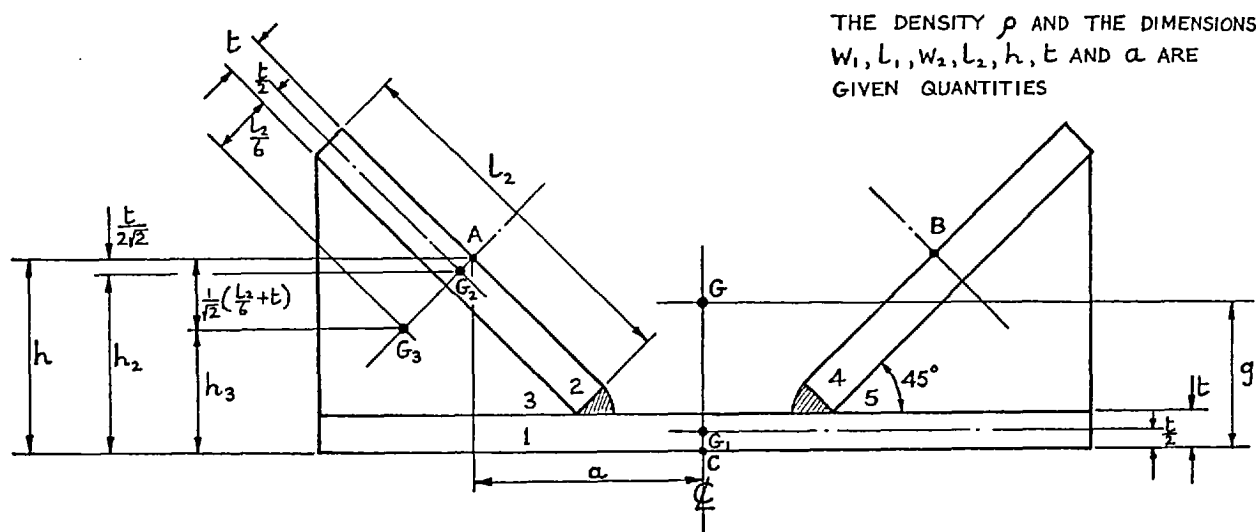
EXPLODED VIEW OF V-SUPPORT
